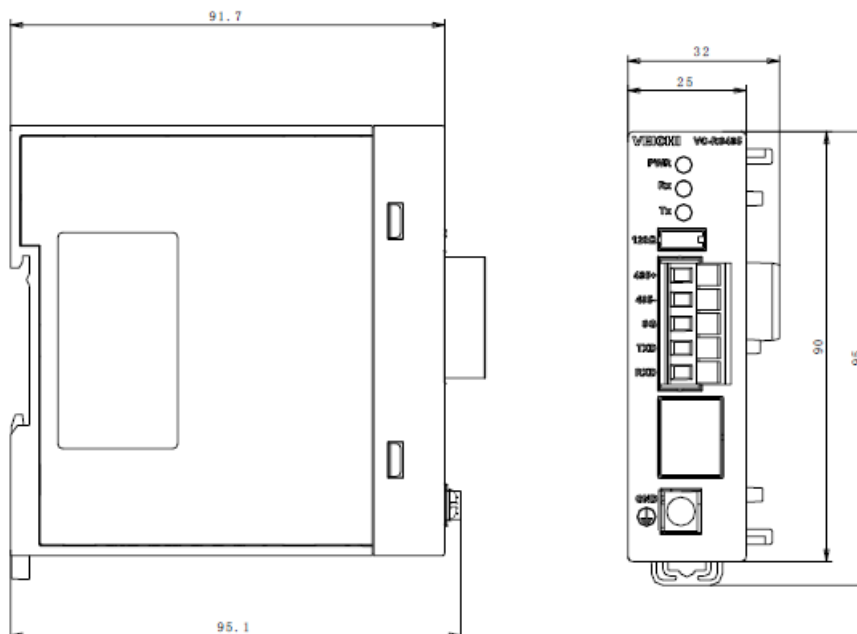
External dimensions and mounting hole dimensions (unit: mm)
